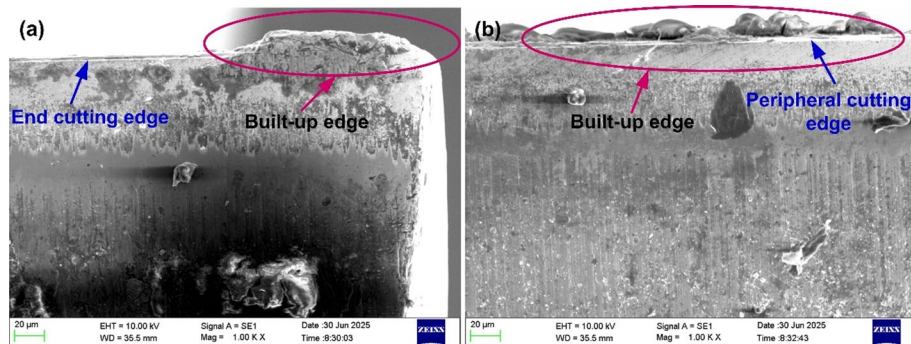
Built-up edge (BUE) observed at the (a) End cutting edge, (b) Peripheral cutting edge of the end mill while milling as-cast alloy
